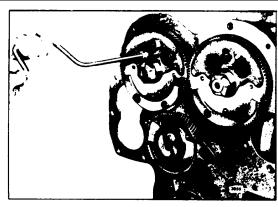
Removing or Installing Thrust Washer Retaining Bolts
